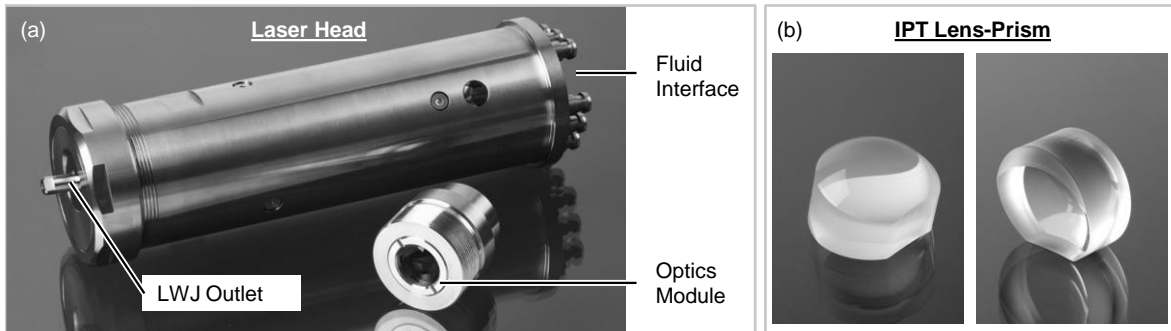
IPT Laser Head (a), Lens prism designed by IPT and manufactured by Sill Optics (b)
